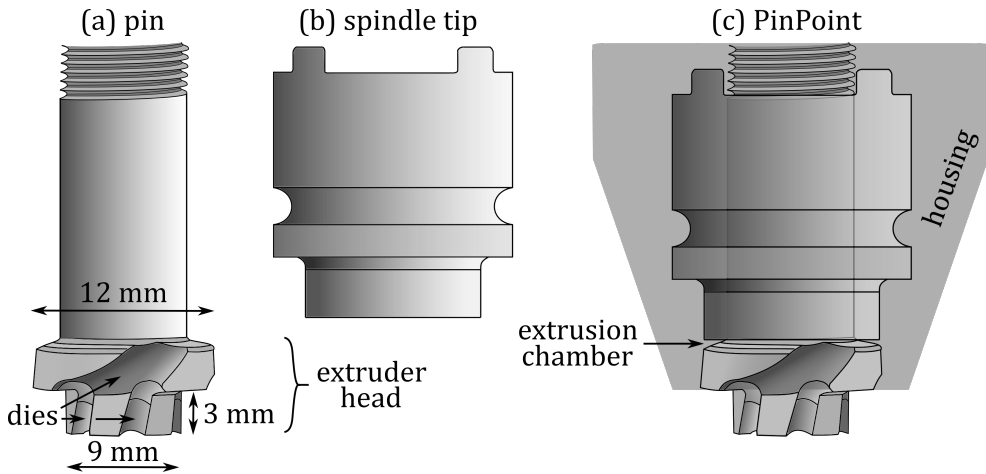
Illustration of the HYB PinPoint extruder tool. Adapted from [95]. (a) The rotating pin that is integrated with extrusion dies in its bottom end. (b) The spindle tip that is fastened onto the pin. (c) The assembled tool where the pin constitutes the two rotating sidewalls of the extrusion chamber, the spindle tip acts as the rotating ceiling wall and the housing functions as the stationary sidewall.
